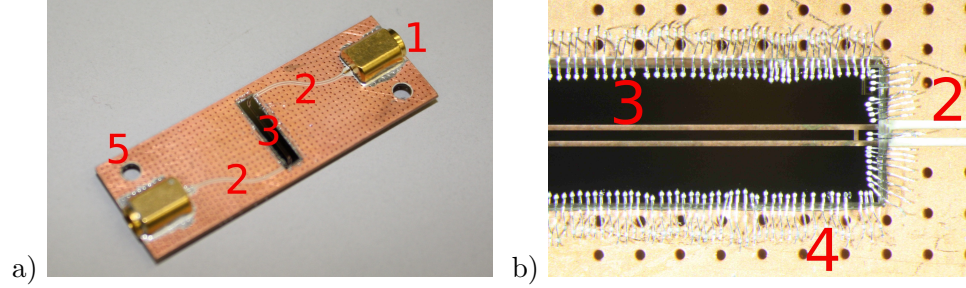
A PCB with a chip in the center. a) is the full sight and b) is a zoom into it. The print MMPX-connectors (1) are connected over the transmission lines of the PCB (2) to the chip (3) in the center of the PCB by aluminum bonds (4). The hole (5) is to screw the PCB on the sample holder in the dipstick
